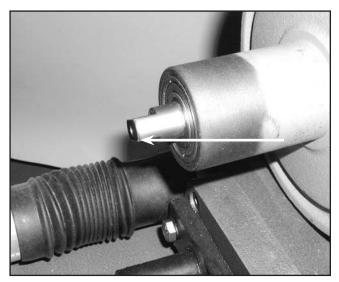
Flat notches on motor spindle fit into flat notches in the boring head mounting sleeve.
